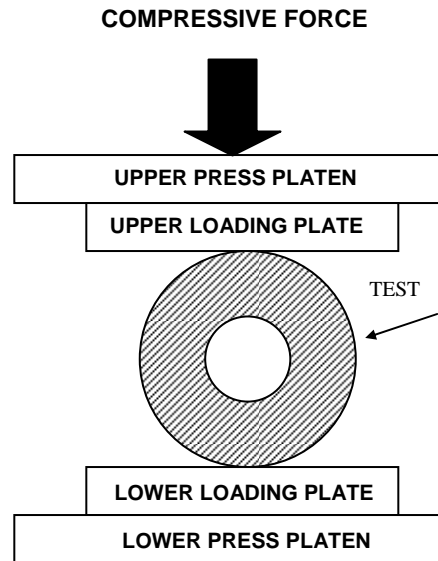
Experimental arrangement showing the holding of the ring shaped specimen.
